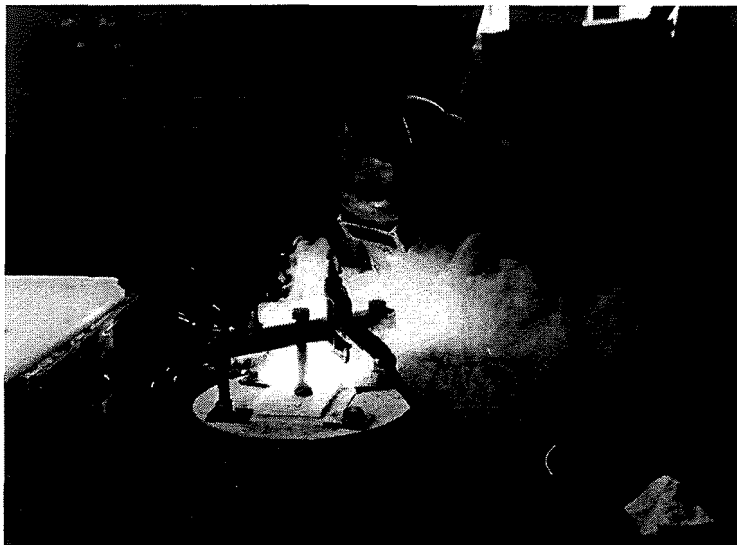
A36 Galvanized Specimen in Setup During Welding
